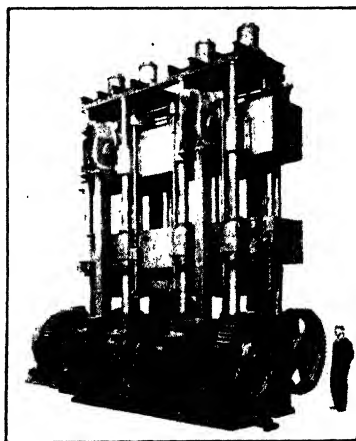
A four-crank double-action press with underneath drive, representing the old inverted types.
